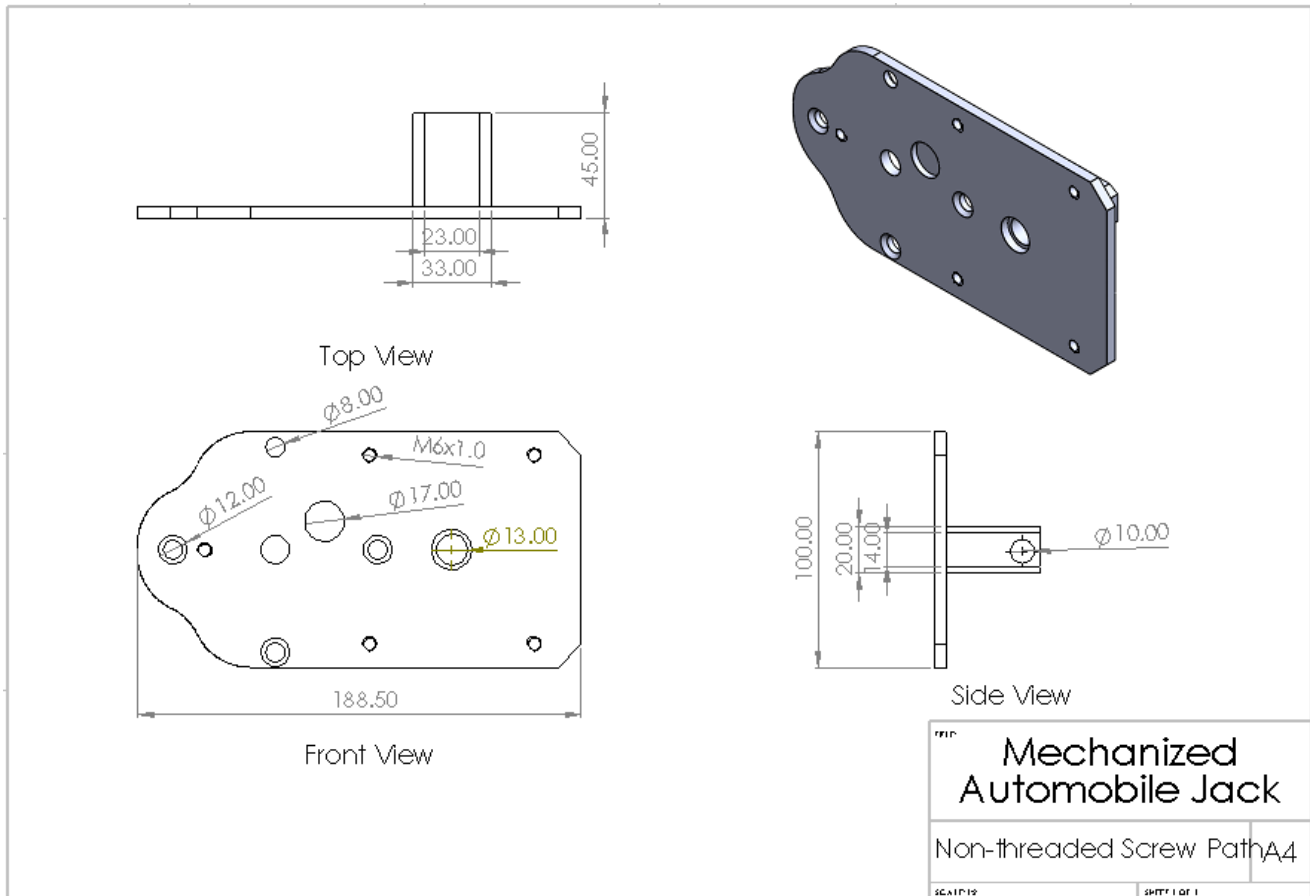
5: 2D detail drawing of Non-Threaded Screw Path Plate
